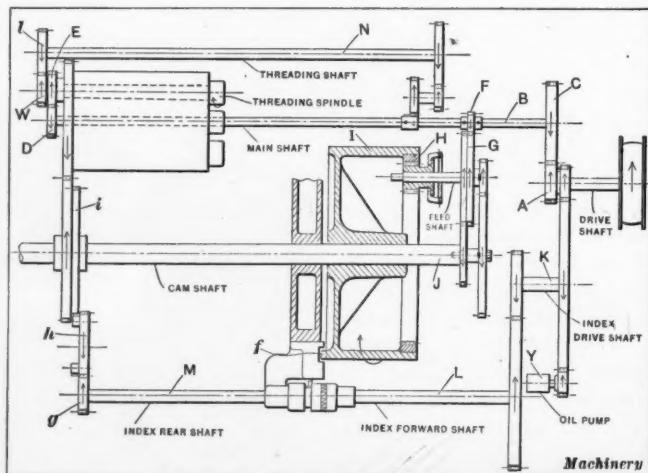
Arrangement of Drive on New Britain Six-spindle Automatic Screw Machine
